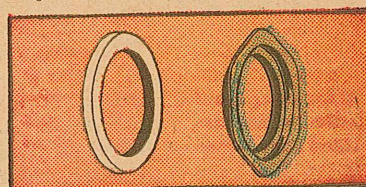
FELT-TYPE SEAL LIP-TYPE SEAL AND FLANGE
